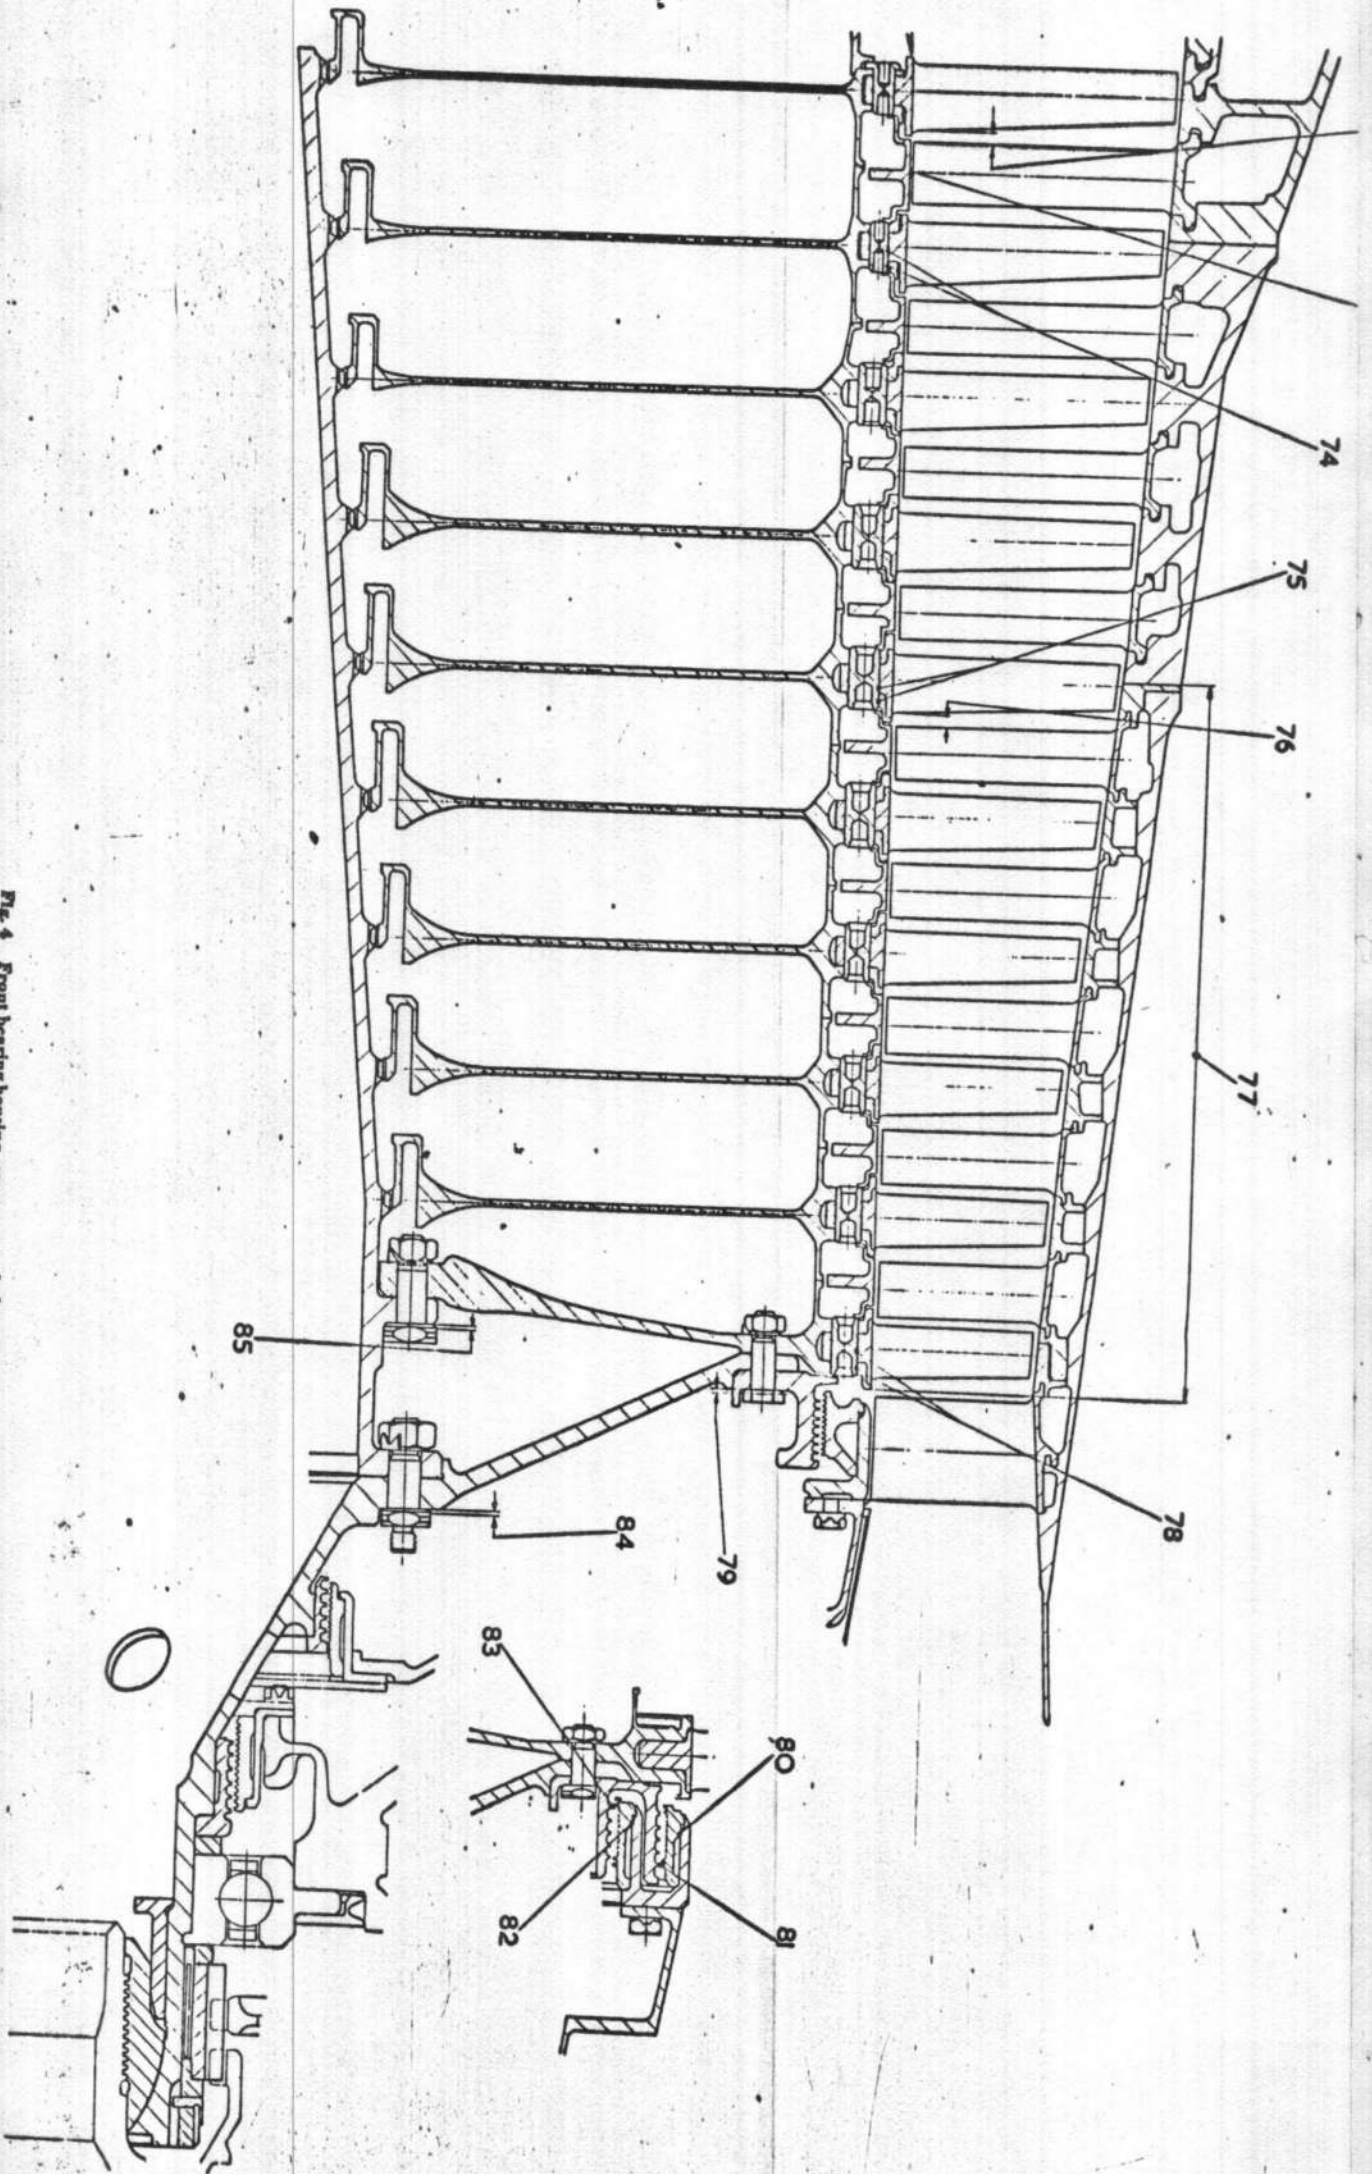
Front bearing housing, compressor shaft, rotors and outlet casing
